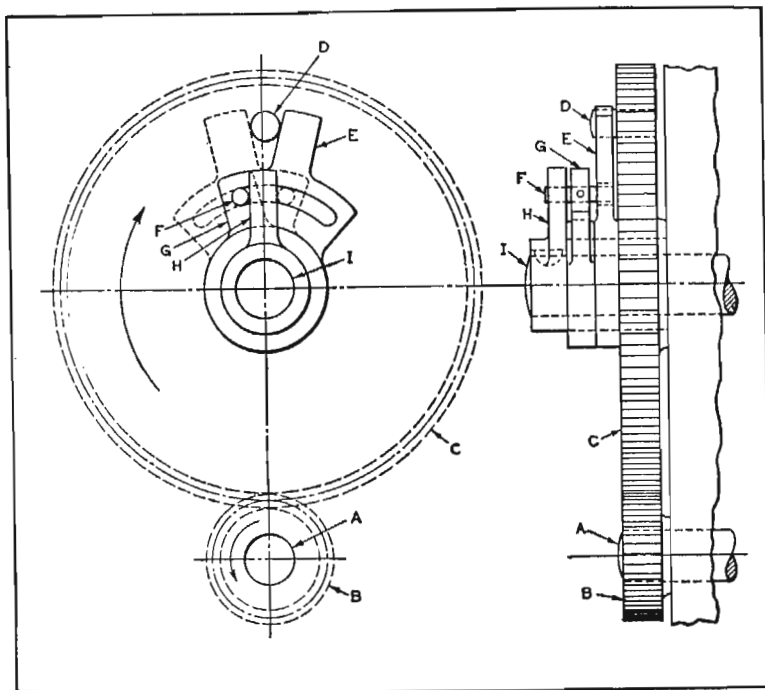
Gear Drive Mechanism that Provides Dwell for Driven Shaft *I* at Each Reversal of Driving Shaft *A*.
